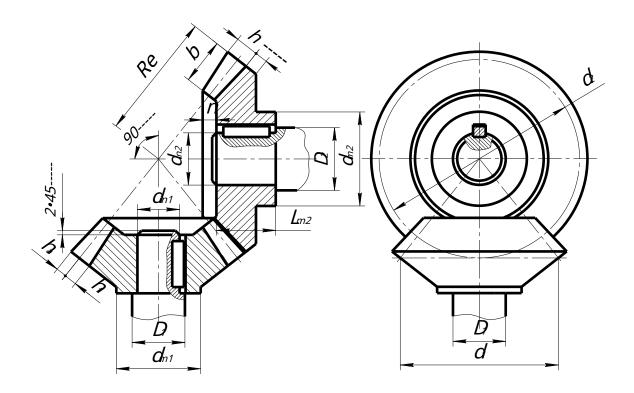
General drawing for calculating geometric parameters of bevel gear transmission
